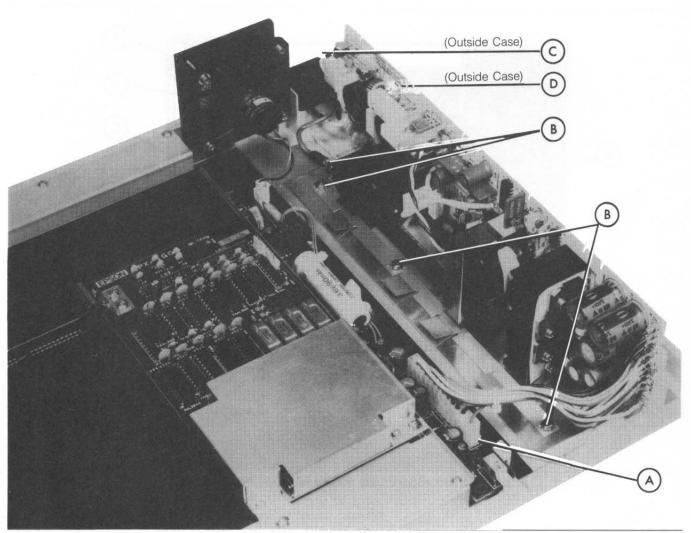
Q10PS POWER SUPPLY BOARD REMOVAL/REPLACEMENT
